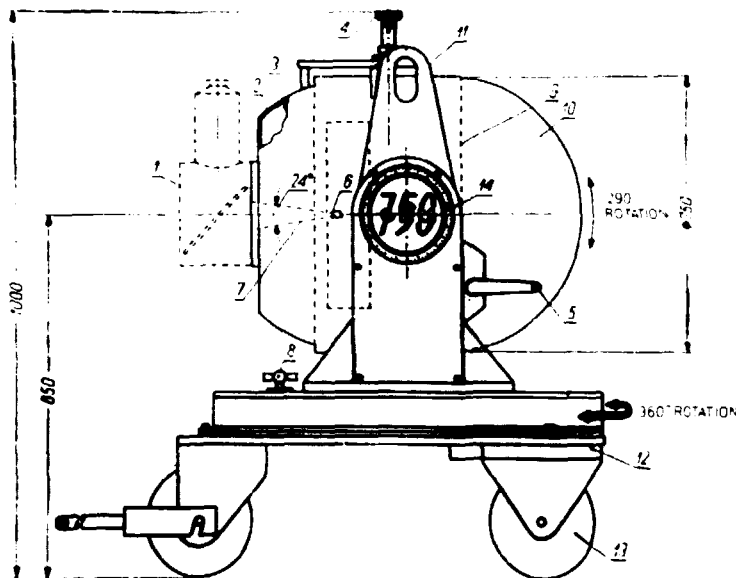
A 750 Ci Co 60 gamma radiography machine
